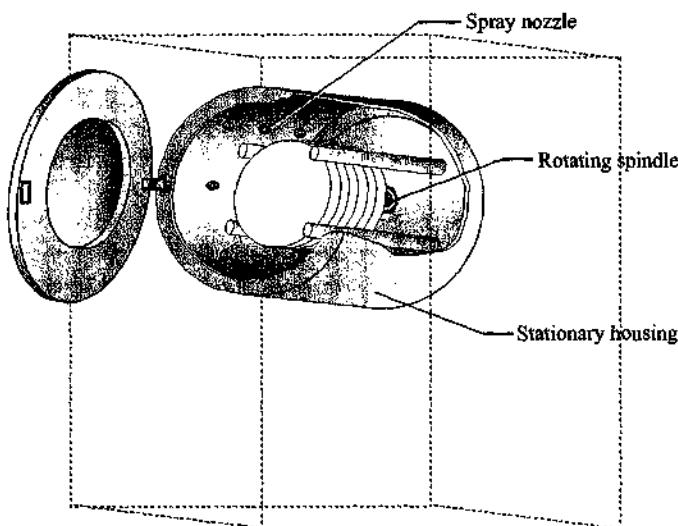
Spray Tool Designs for Wafer Cleaning
